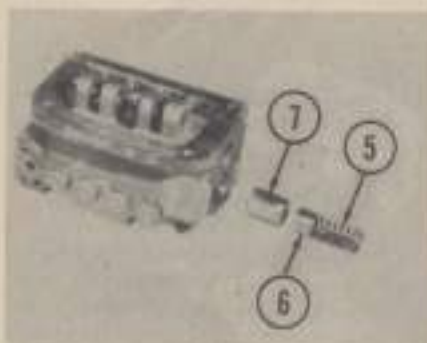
Dampener piston (6), sleeve (7) and spring (5) removed from pump body.
